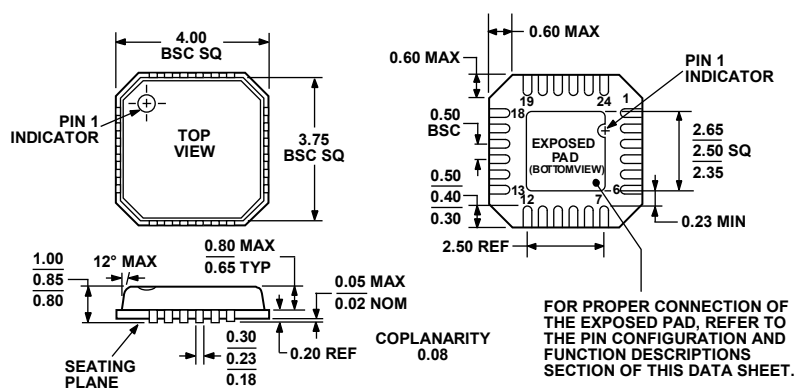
Dimensions for Evaluation Board Layout for the ADL5380 Package
